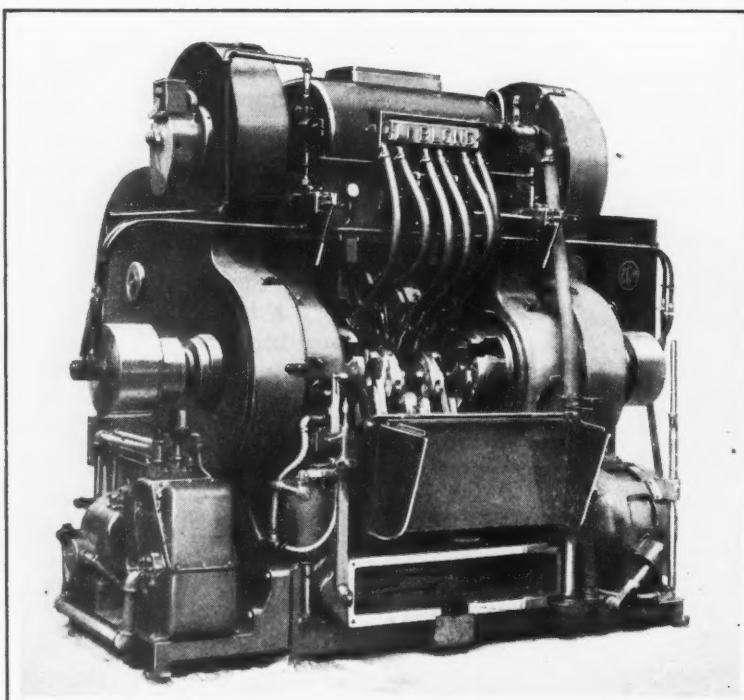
LeBlond Machine which Simultaneously Turns All Crankpins and Faces All Webs of Automotive Crankshafts
